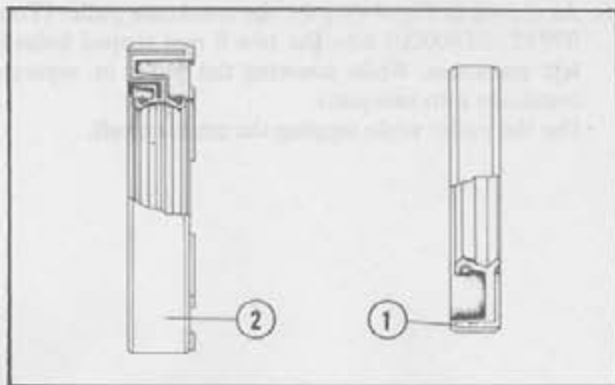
① Left crankcase oil seal ② Right crankcase oil seal
